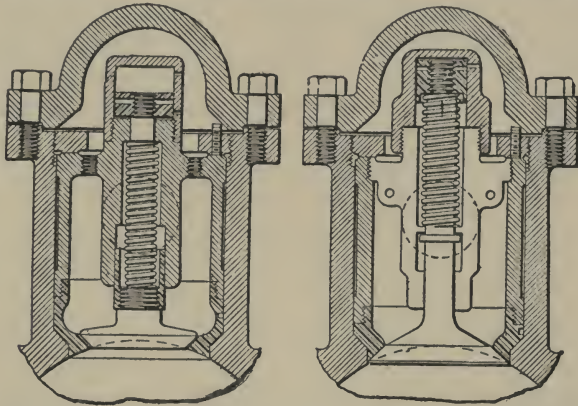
Discharge and Section Valves designed for "line" contact and supplied with dash pots
